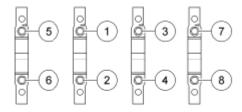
Locating Main Bearing Cap Courtesy of FORD MOTOR CO.
